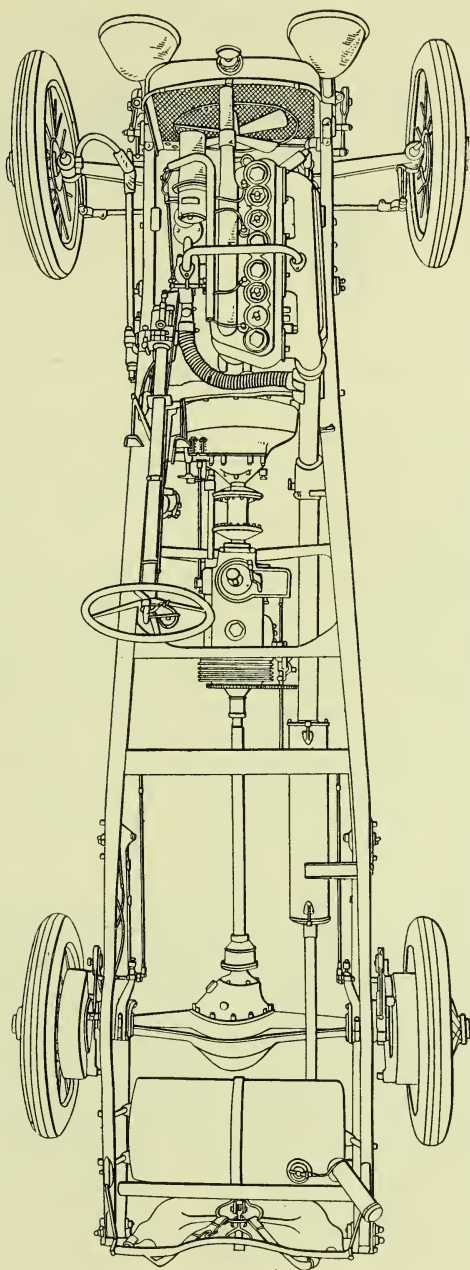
A PASSENGER CAR CHASSIS HAVING A VERY SIMPLE BRAKE LAYOUT IN WHICH THE BRAKE CAMSHAFT PASSES THROUGH THE TRANSMISSION HOUSING AND OPERATES AN INTERNAL CAM ON THE BRAKE BACK OF THE TRANSMISSION
